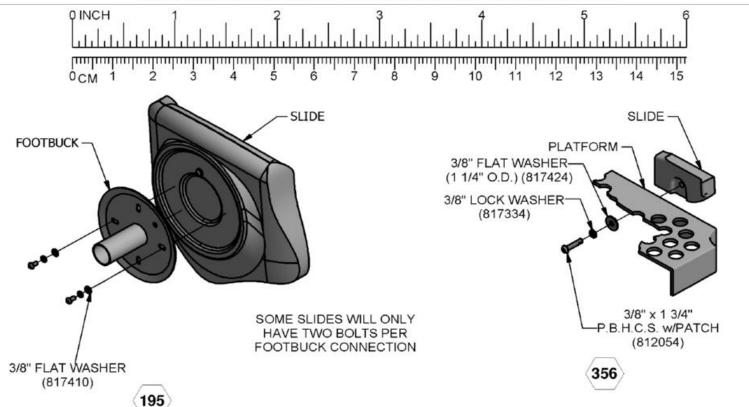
, 90701, 90763, 90703 THRU 90710, 90718, 90762, 90764, 90729 & 90776.
